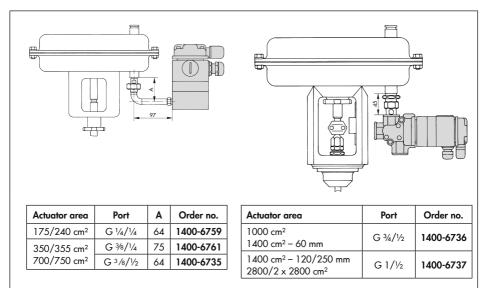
Mounting on linear actuators using CrNiMo steel pipe fitting
